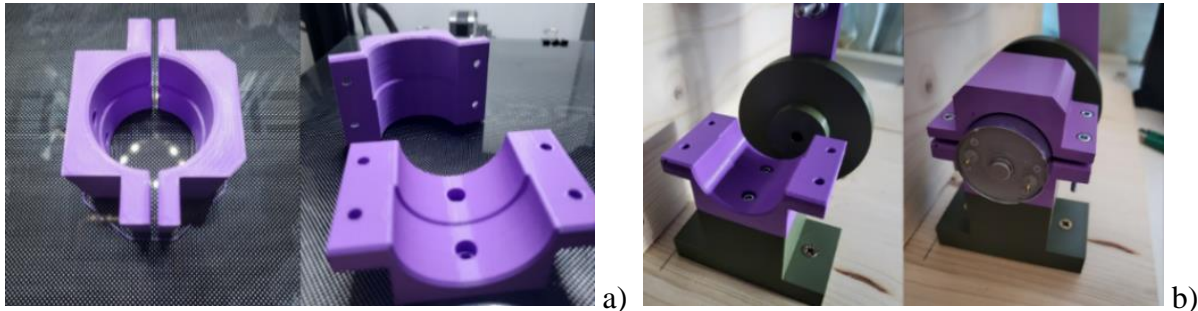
Motor support: a) 3DP of the moving parts – V3; b) Assembly of the moving parts V3.
